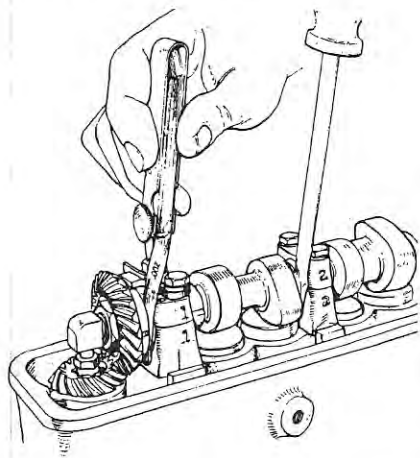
To check the camshaft end play, take up the slack with a screwdriver as shown, then measure clearance with a feeler gage. Refer to text.
